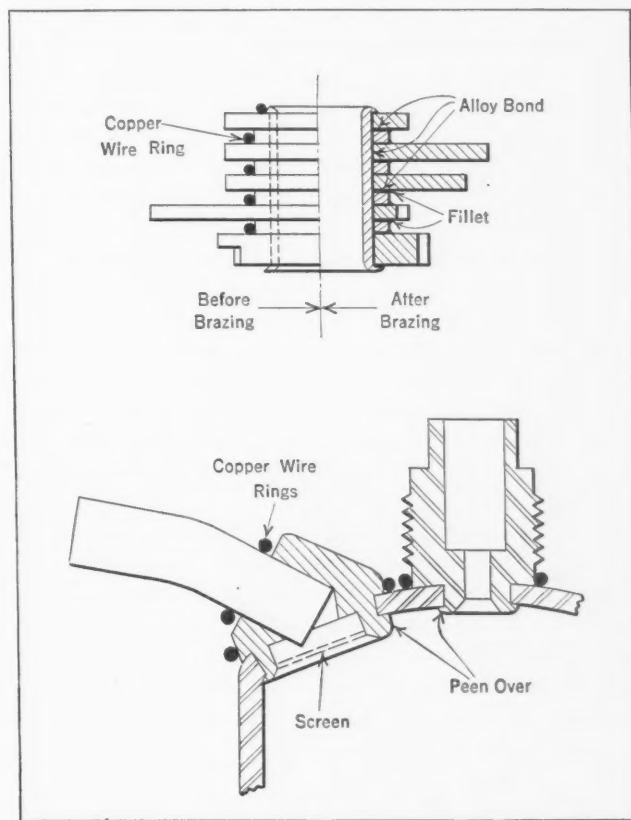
(Upper View) Details of Brazed Cam Cluster Assembly Shown at B, Fig. 4. (Lower View) Assembly Details of Float Chamber Shown at D, Fig. 4
